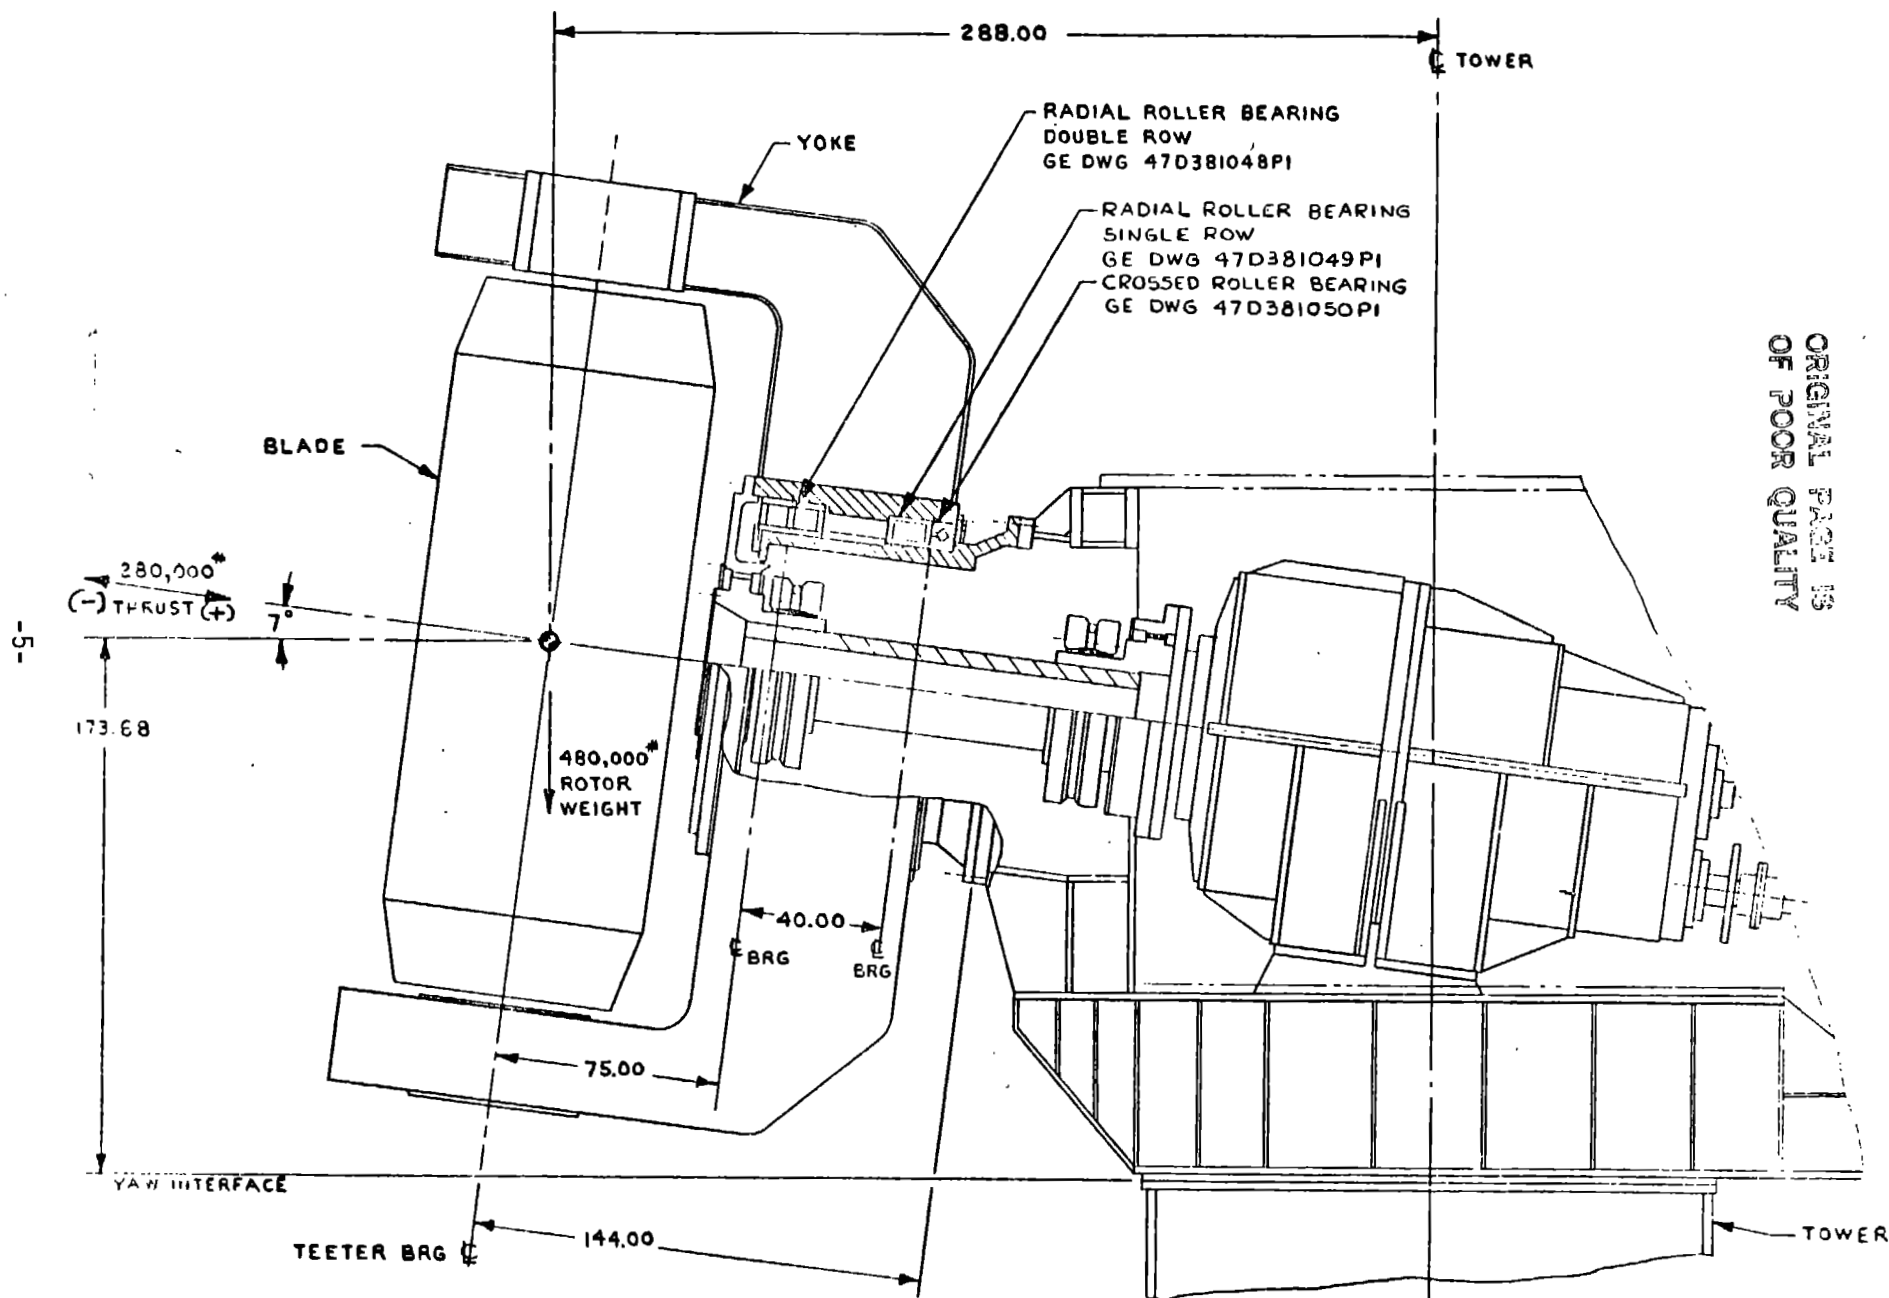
ROTOR SUPPORT BEARING ASSEMBLY
